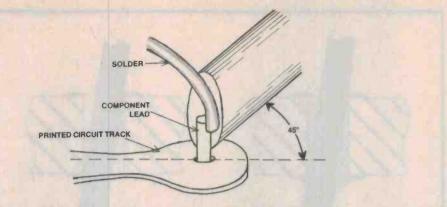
When soldering a component lead to a printed circuit board, apply the iron to the lead with the tip touching the copper track as well.
